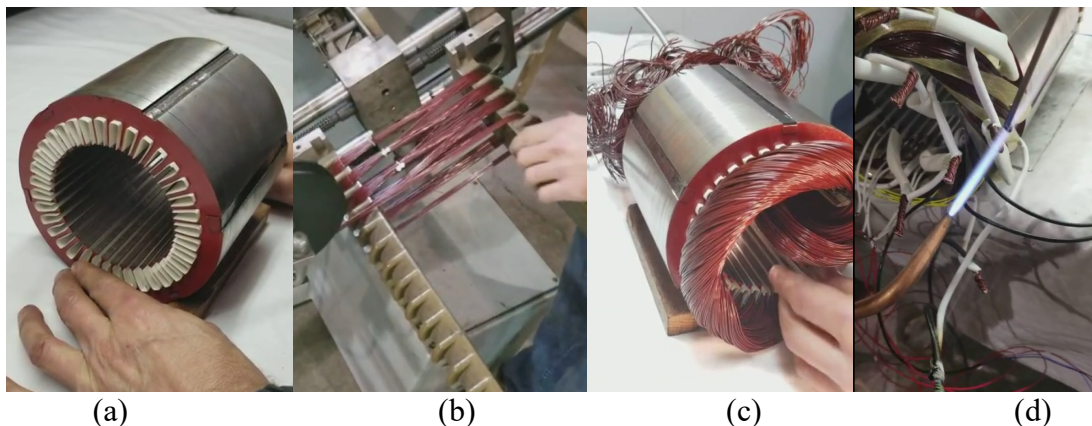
Steps of winding the stator. (a) insertion of insulation paper. (b). coil forming, (c) insertion of coils in slots. (d) connecting the coil groups.
